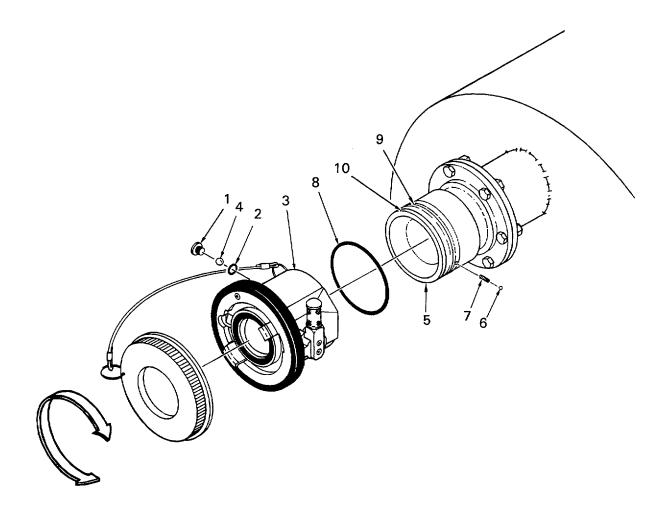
Inlet/Outlet Unisex Coupling Removal
